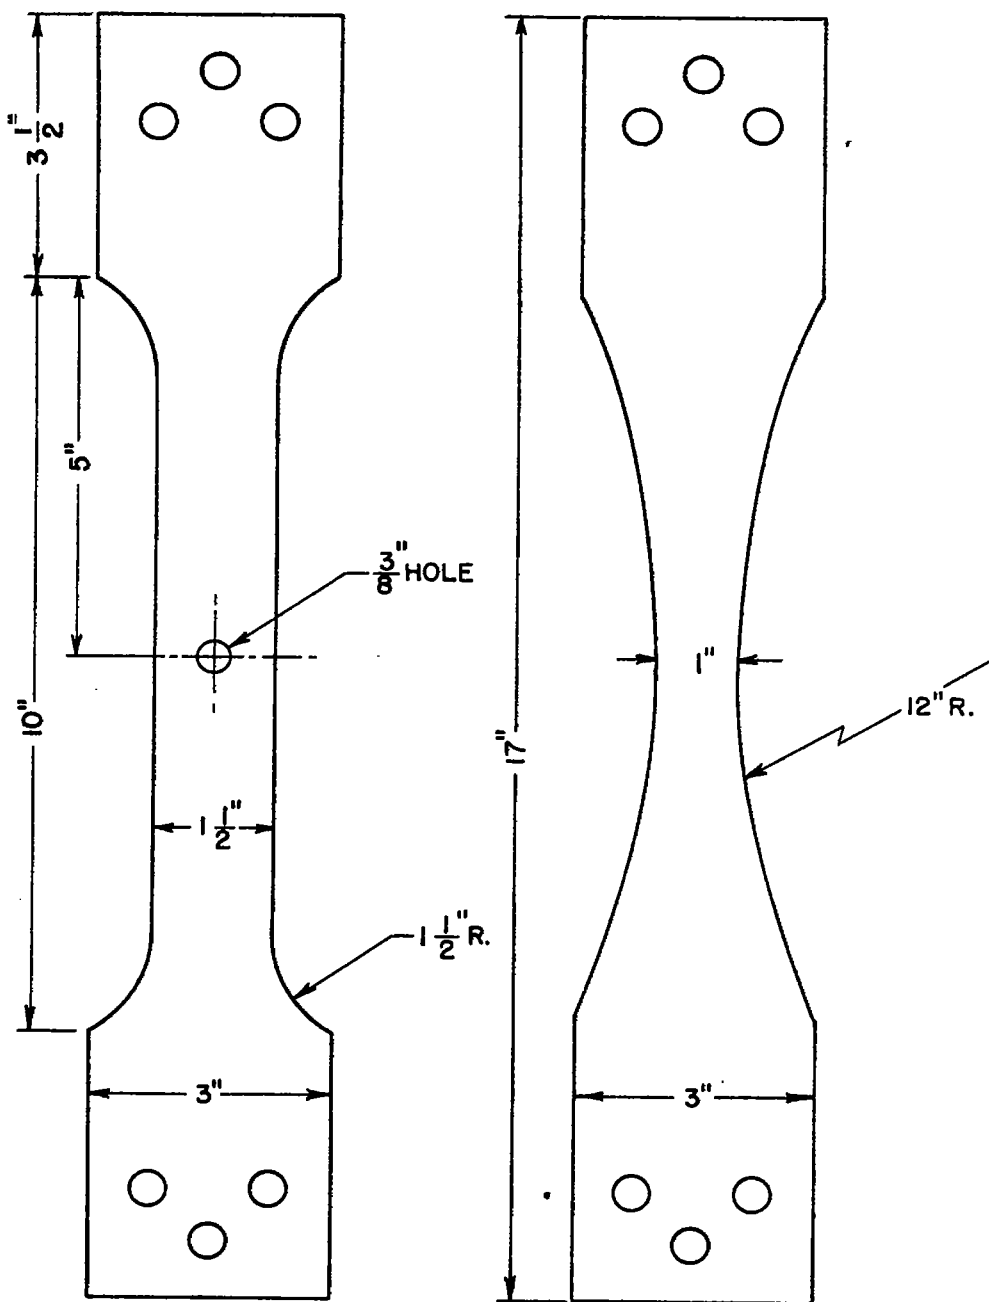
FATIGUE TEST SPECIMENS USED AT BATTELLE FOR AUXILIARY TESTS.
